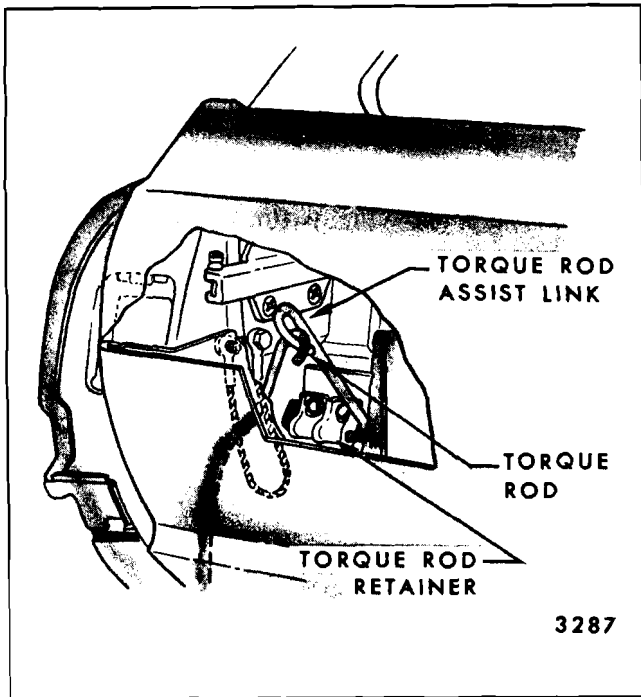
Dual Gate - Torque Rod to Body Attachment
